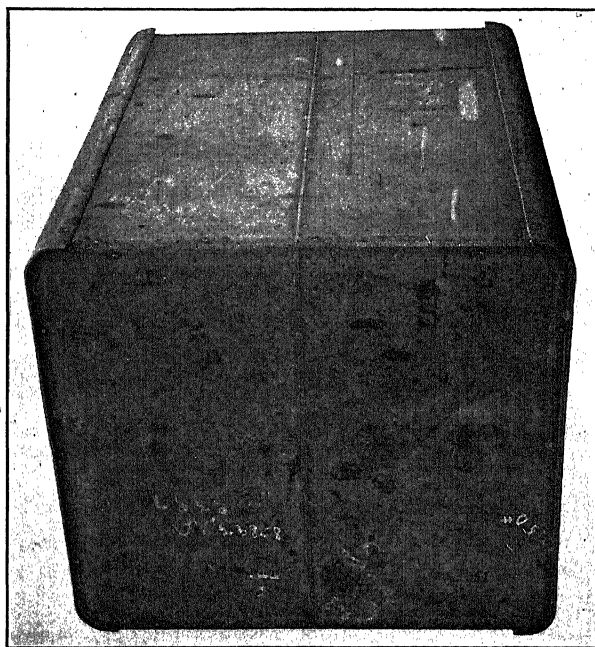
ELECTRIC-ARC WELDED STEEL BOX OF $\frac{1}{2}$ -IN. TANK STEEL.
